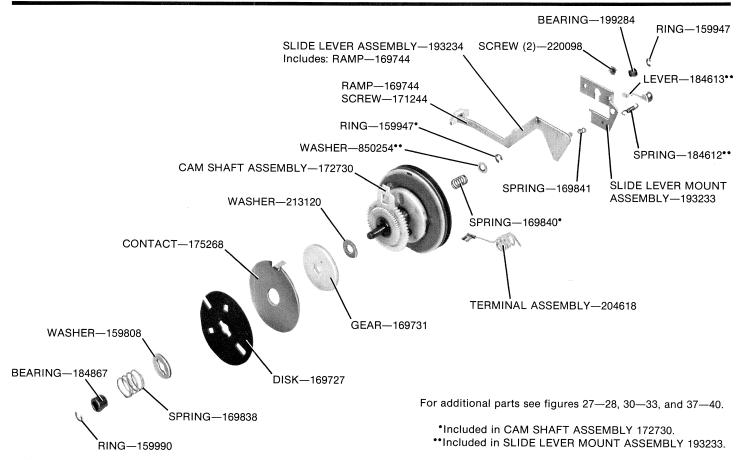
MECHANISM ASSEMBLY (800 and 800H PROJECTORS)—170741
